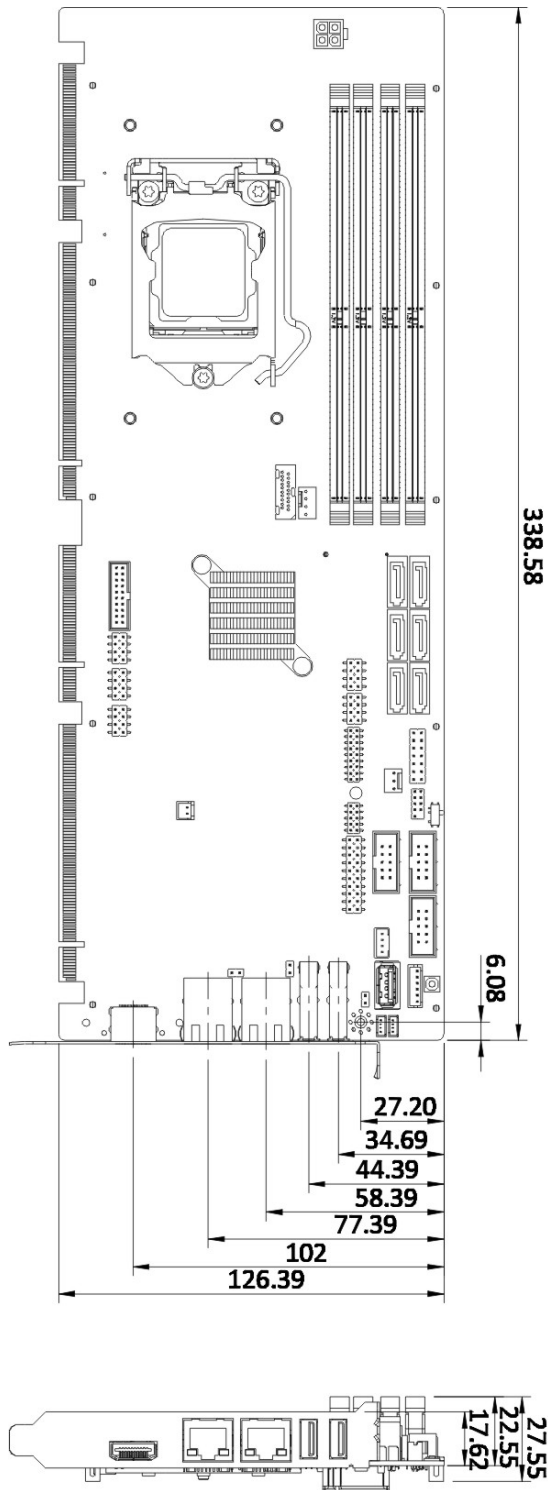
PCIE-Q370-HDMI Dimensions (mm)
